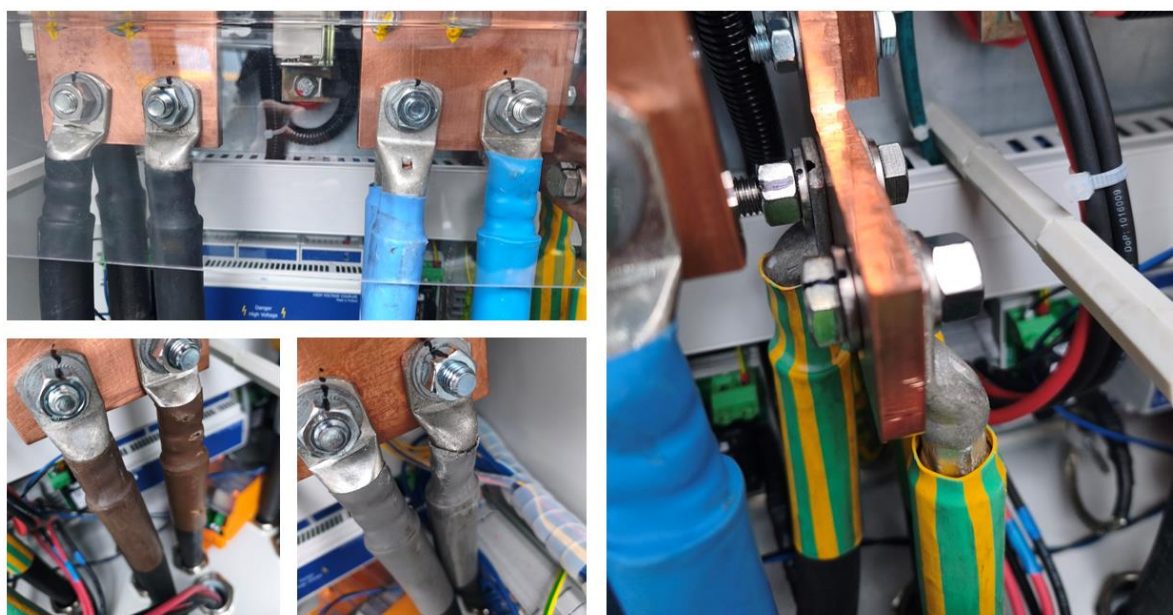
Proof DC outlet torque and marking: Pe and DC +/- connections
